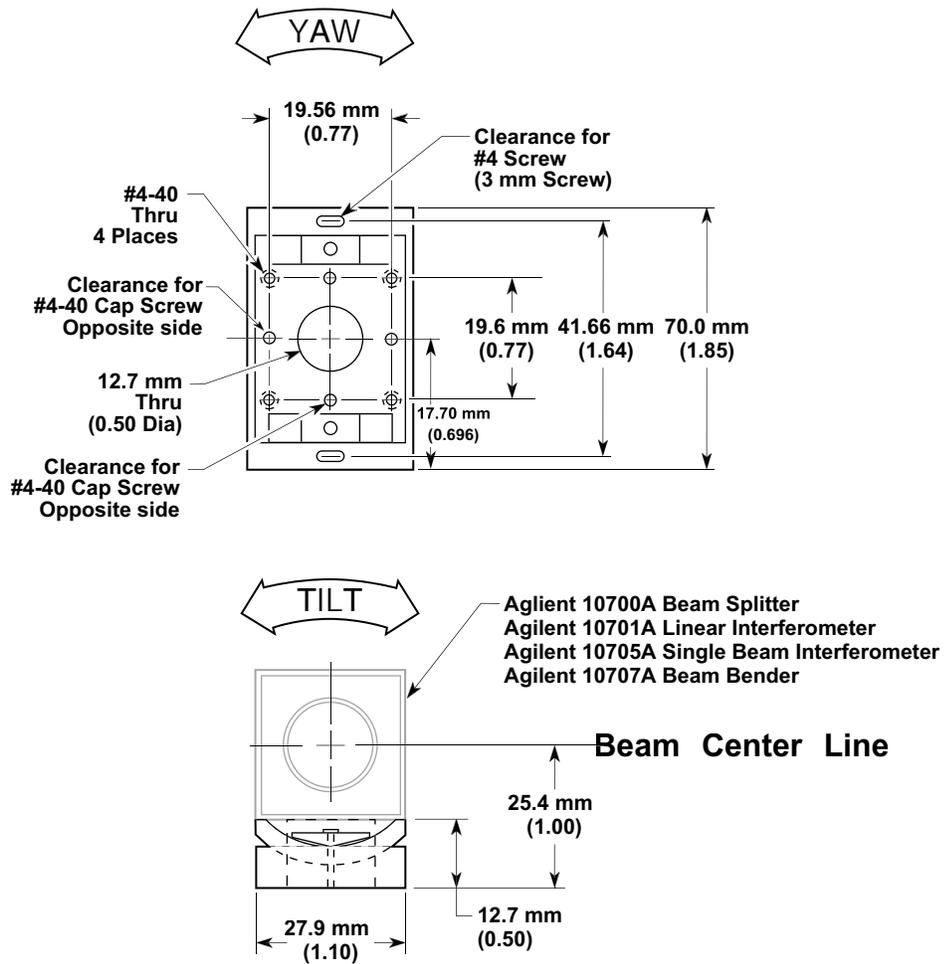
Agilent 10710B Adjustable Mount — dimensions
